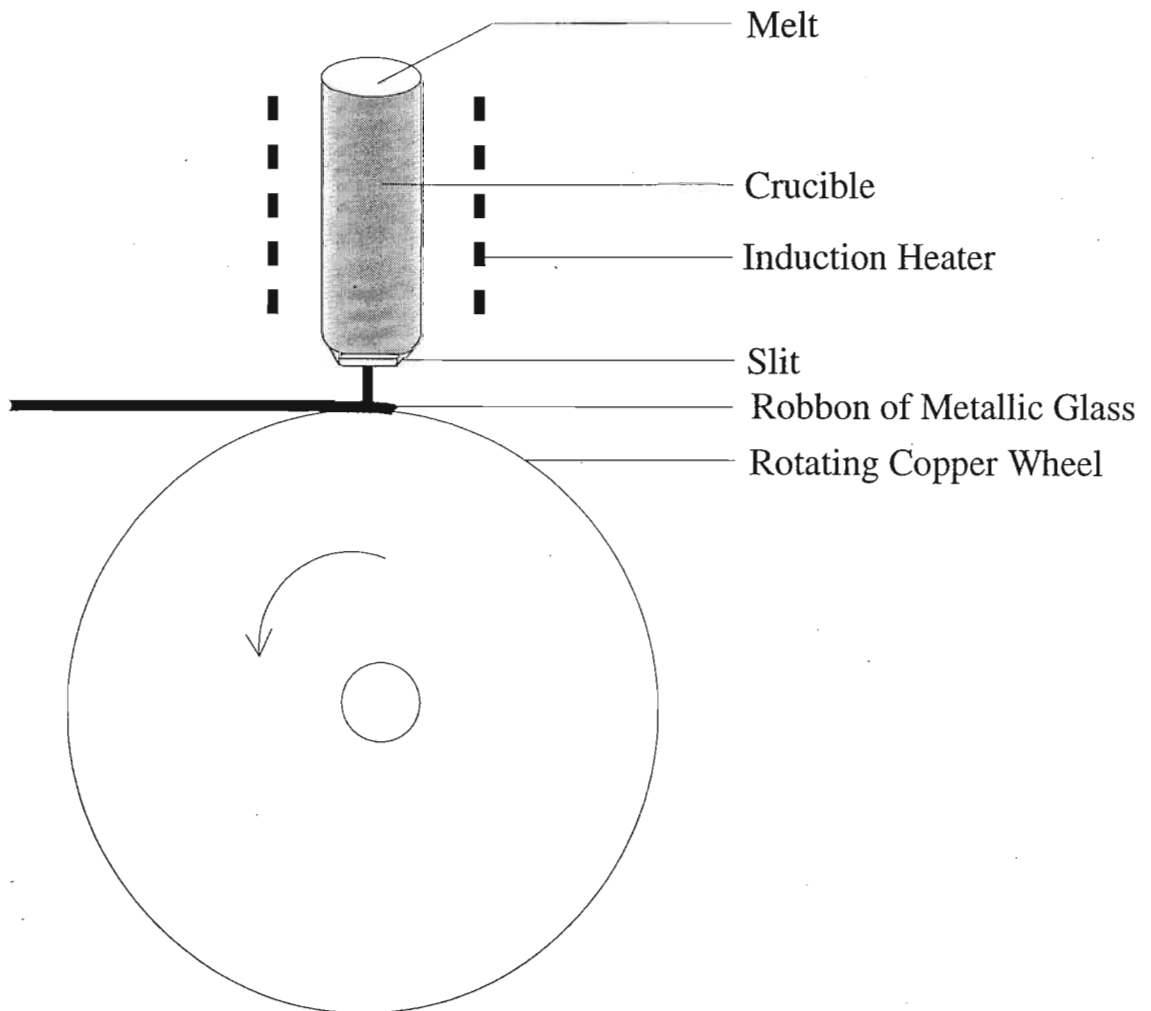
Melt Spinning technique for fabrication of ribbon specimens.
